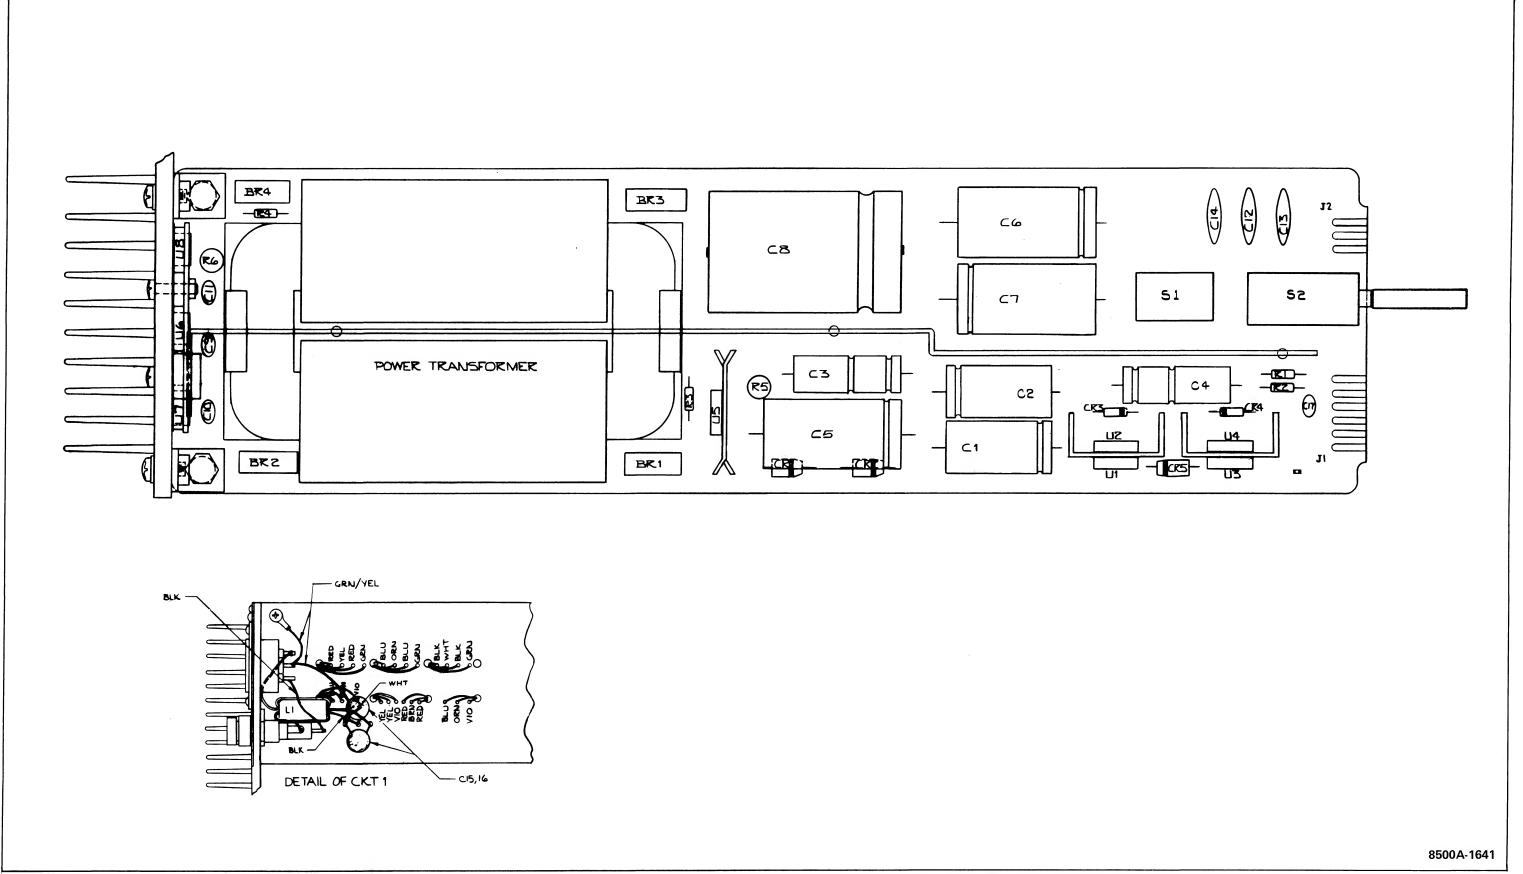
A4 Power Supply PCB Assembly— Type 41
